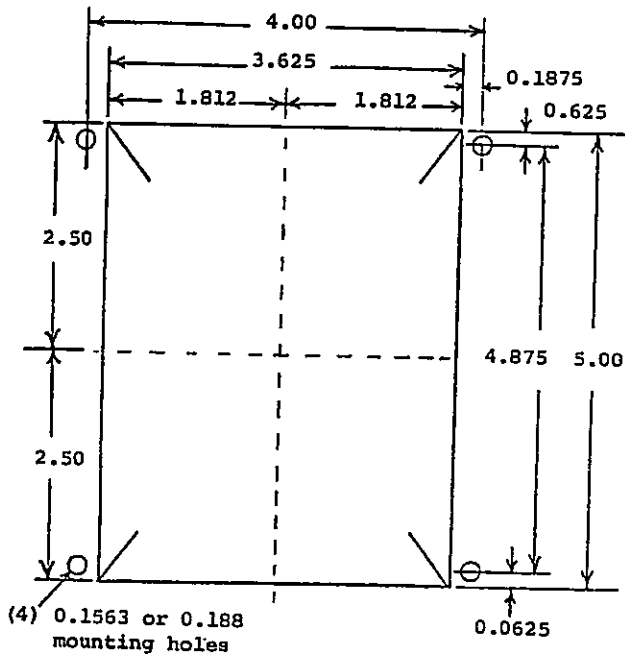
Panel Cutout for FLUSH MOUNTED MONITOR (dimensions in inches)
